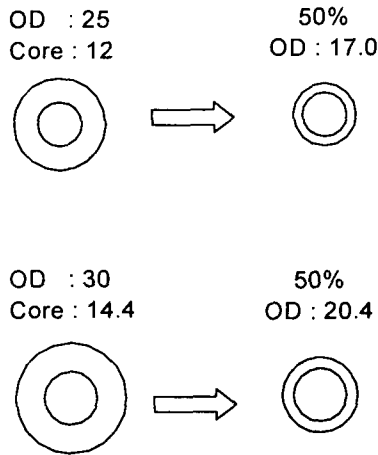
Shaving condition of NbTi/Cu rods after extruded.
